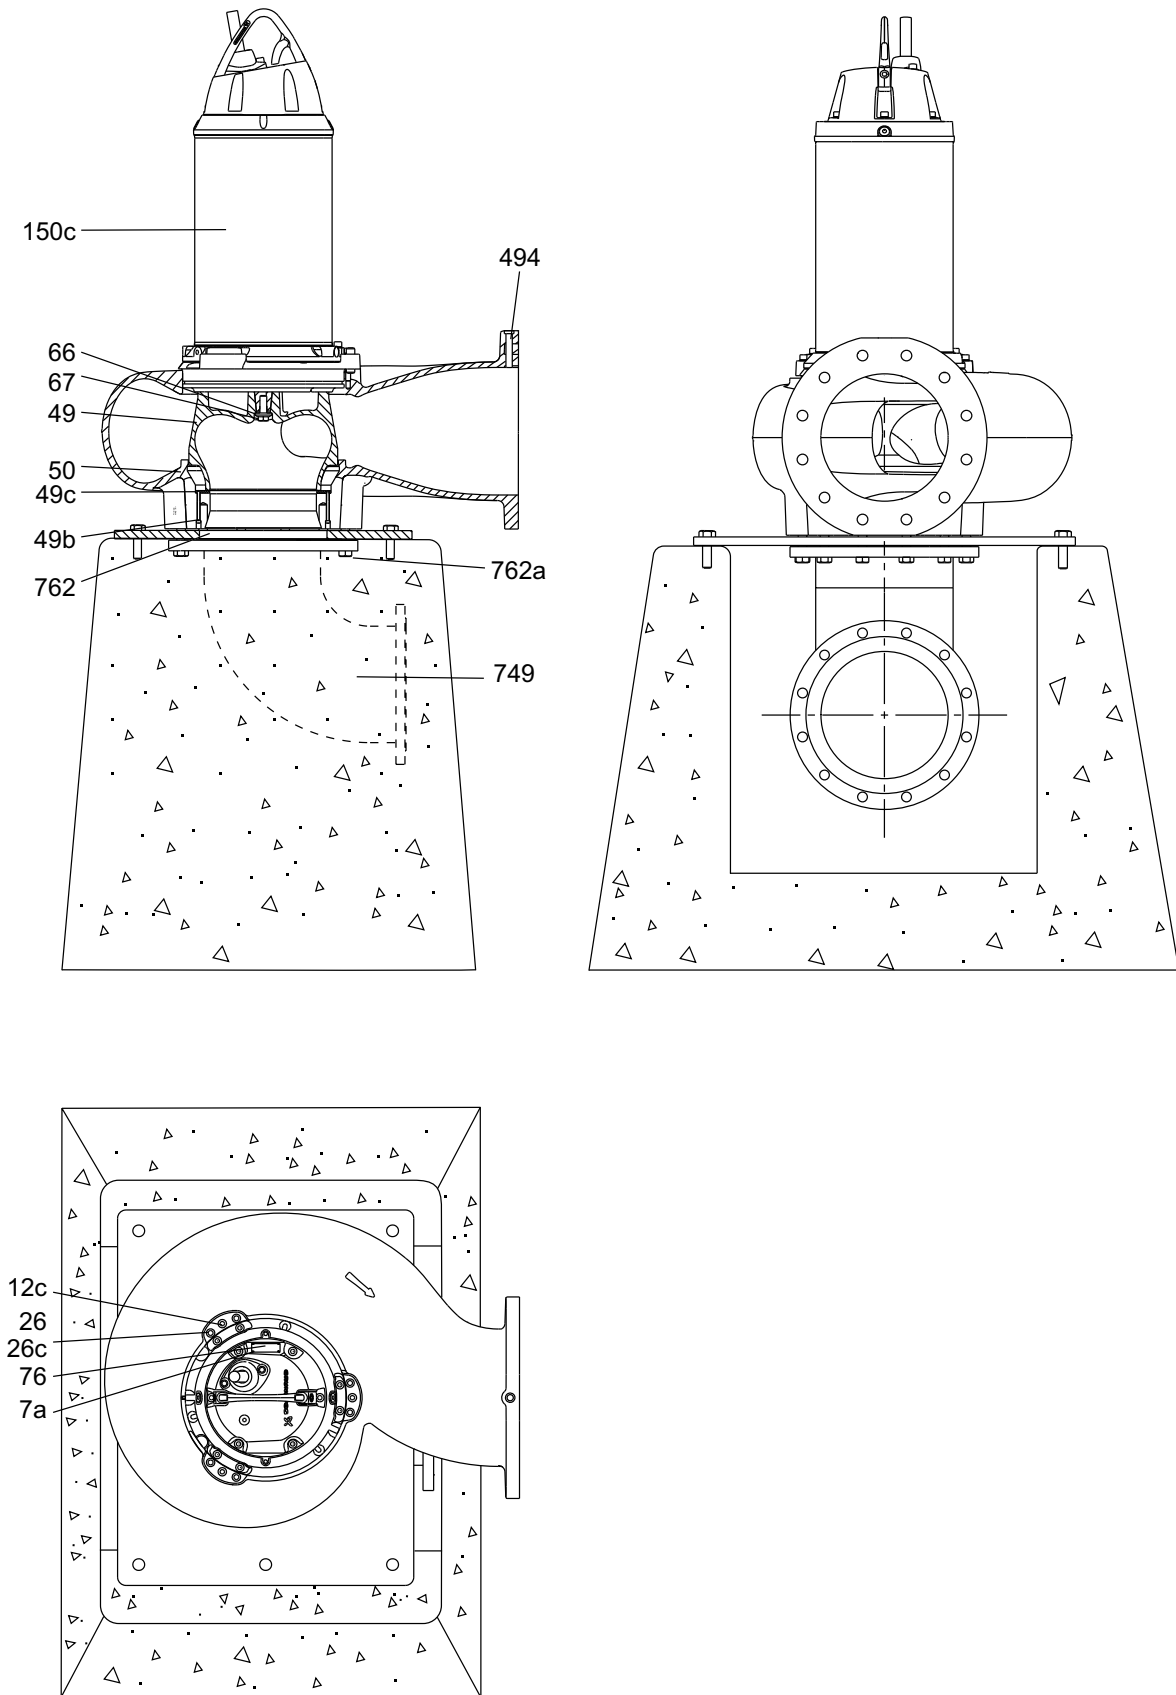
SE pump, dry installation on concrete foundation - version 2 (DN 250 and up)
